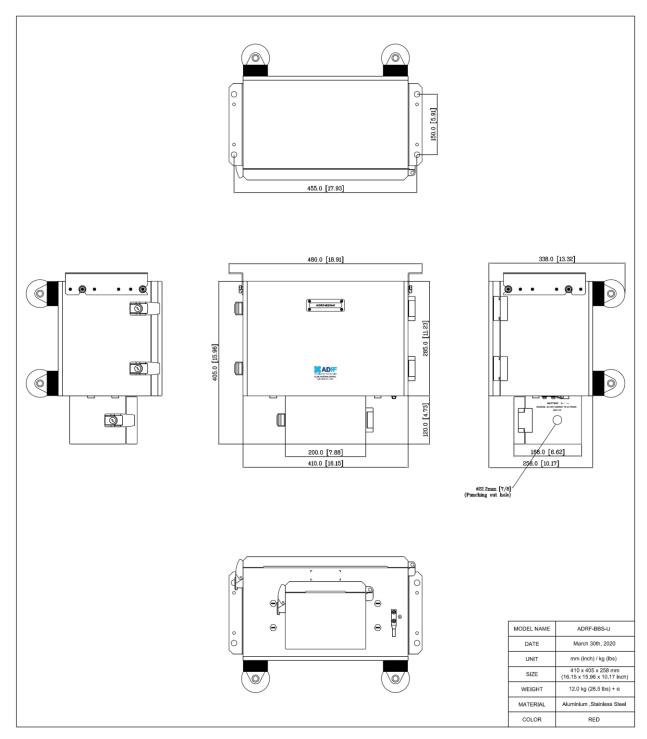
ADRF-BBS-U Mechanical Drawing
